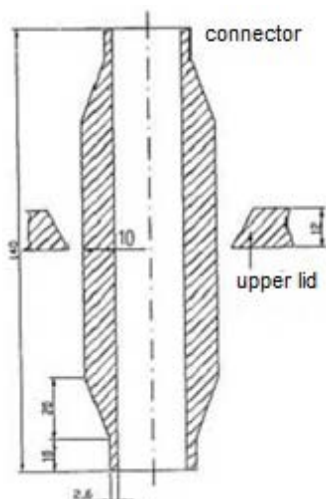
Shape and dimensions of the connector reinforcement and welded joint groove.
